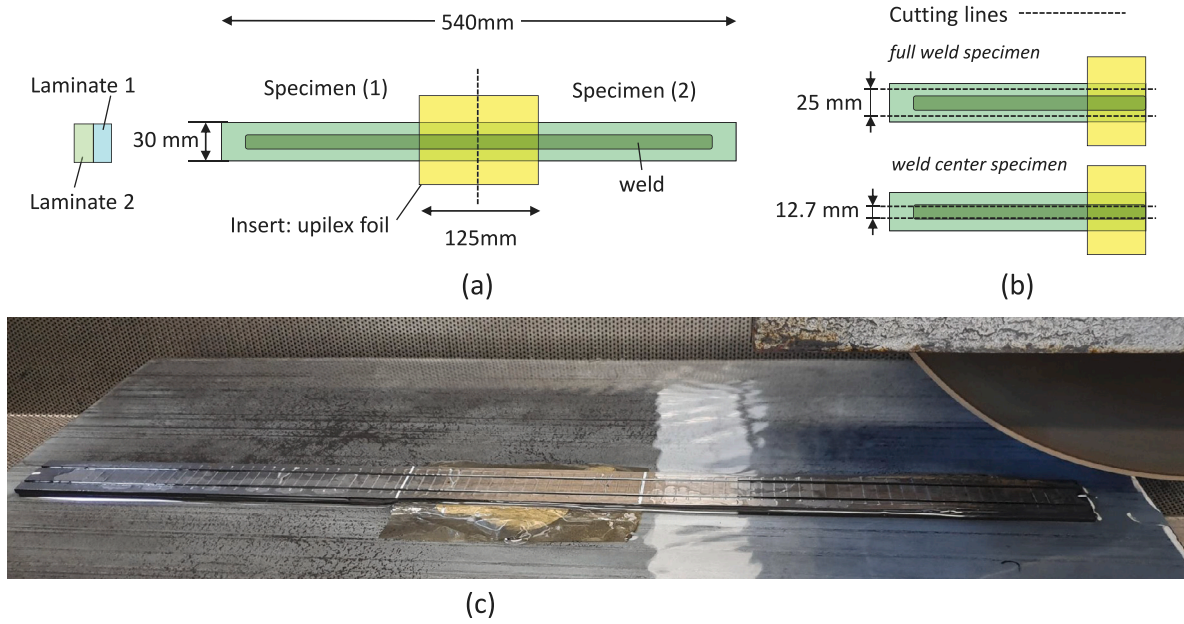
Welded joint characterization specimens: (a) Welded laminates with upilex foil insert; (b) Full weld and center weld specimen design; (c) Machining of center weld specimens.
